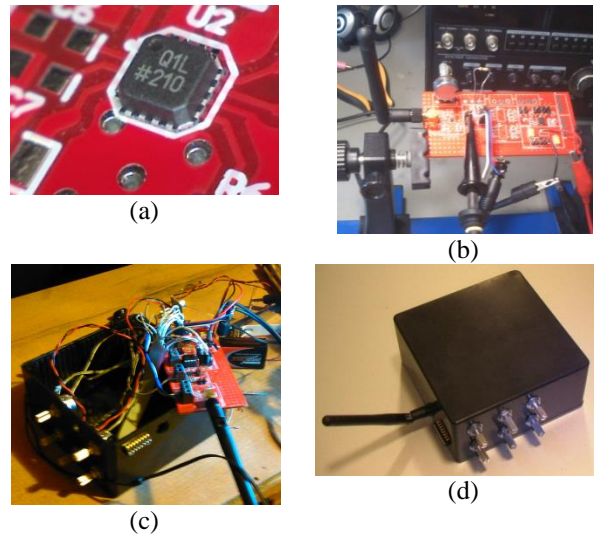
Soldering, testing and assembly phases: (a) ADL5513 chip soldered on the PCB board., (b) soldering and testing, (c,d) final “black box” enclosure.
